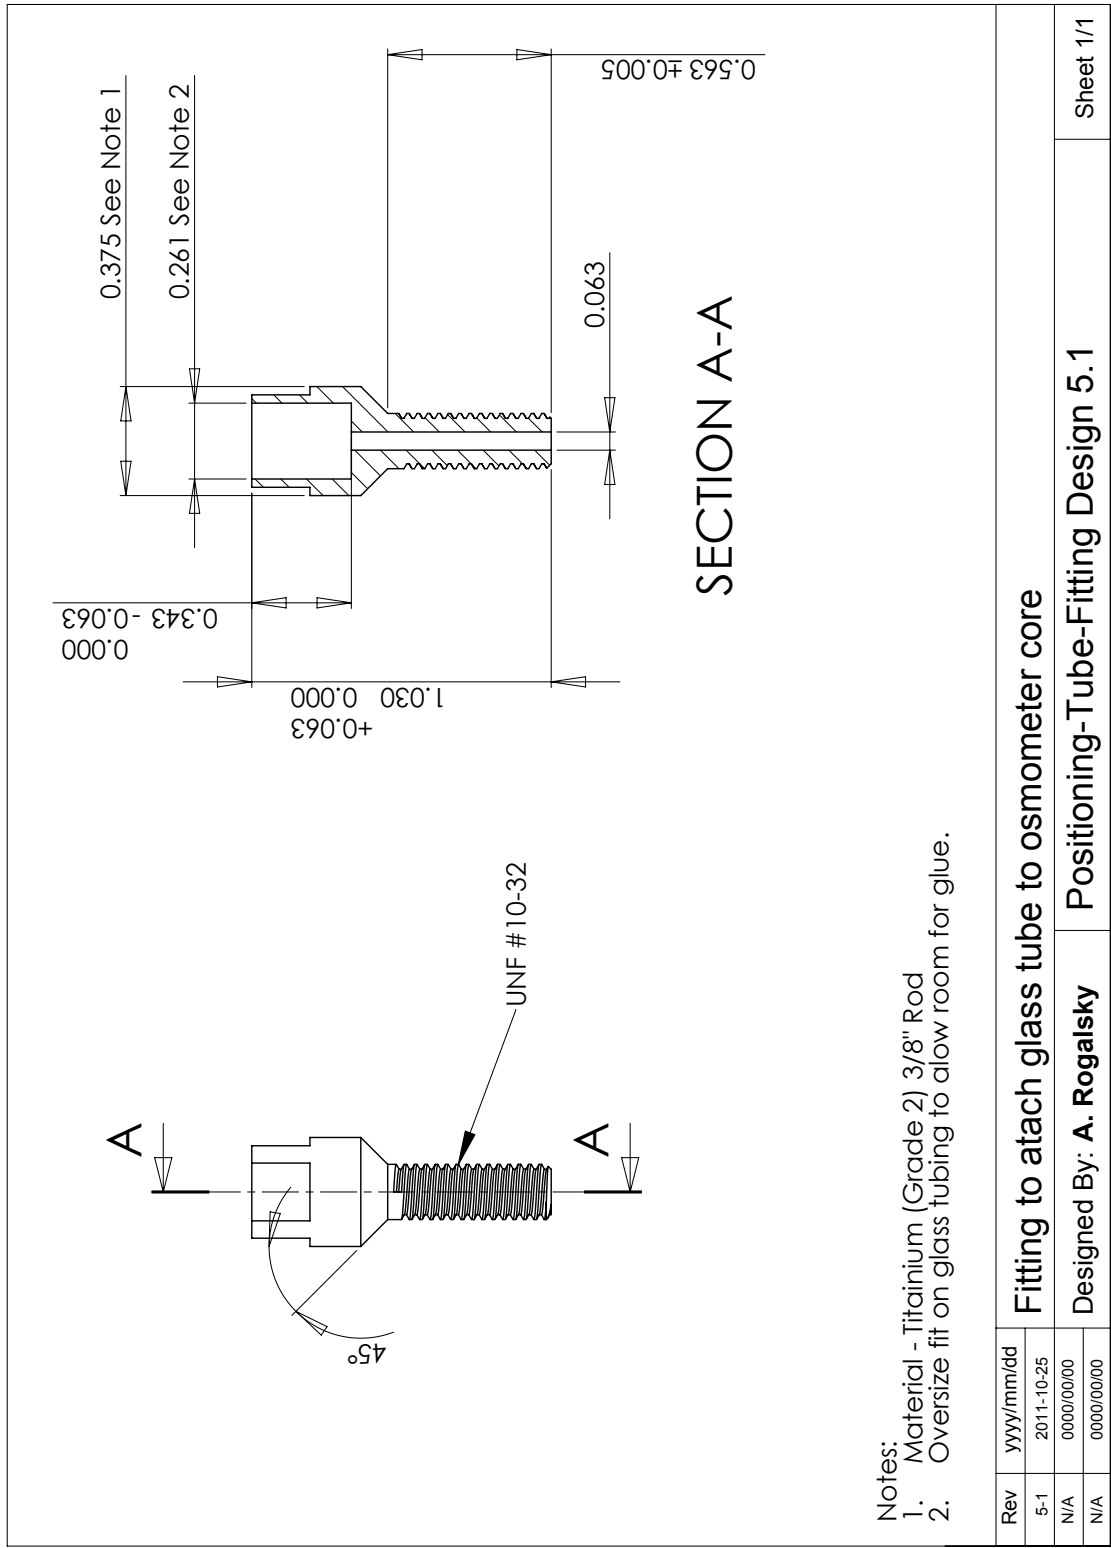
Osmometer Top Level 5.2 / Core Assembly 5.2 / Tube Fitting 5.1
